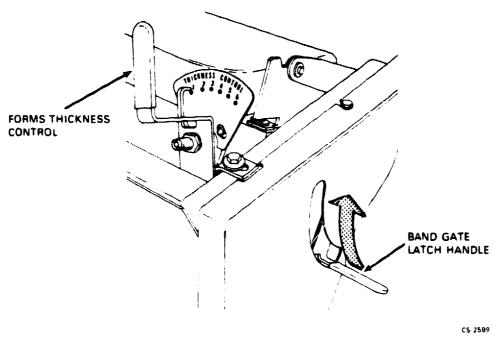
Band Gate Door Assembly (Front Right Hand Side of Printer with Cover Raised)
